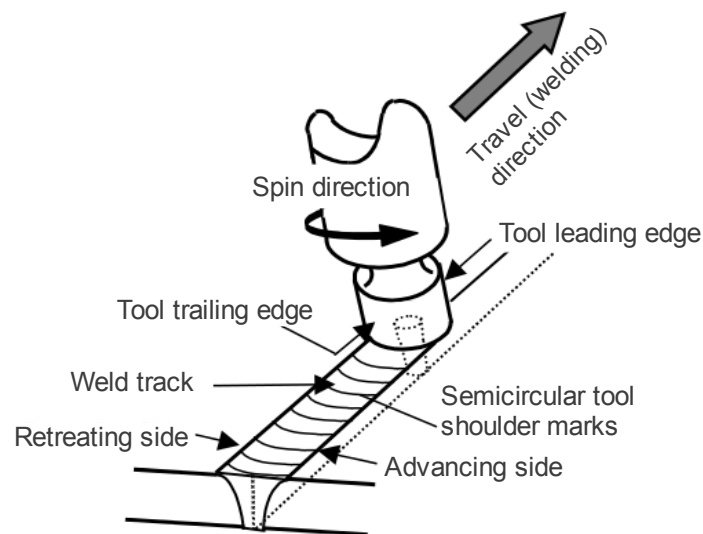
Schematic drawing and terminology of the FSW process [35]
